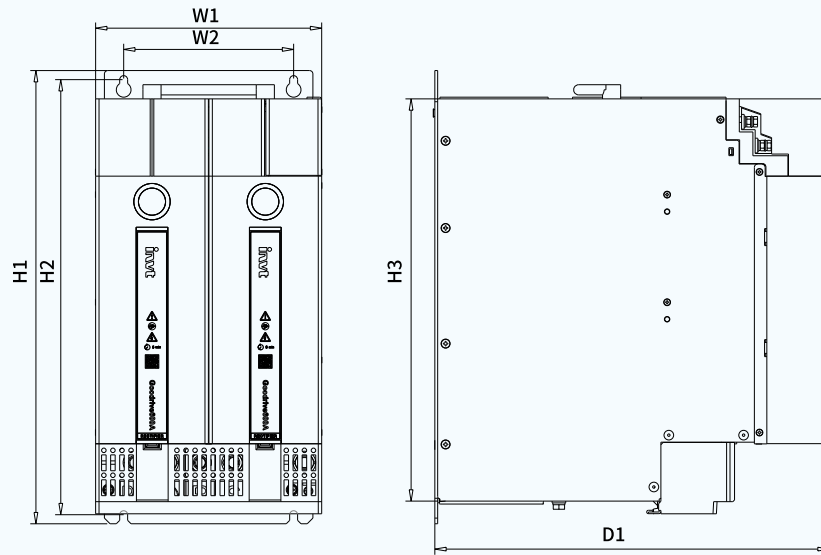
Wall mounting drawing for the 380V 110kW uncontrolled rectifier unit
